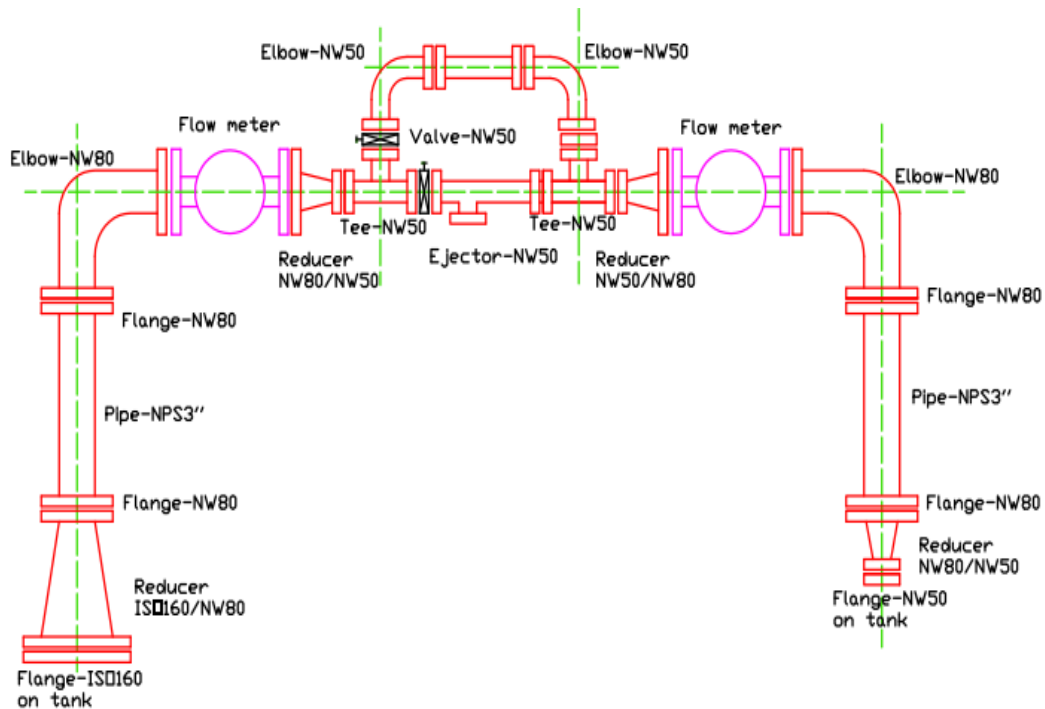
MED plant inter-stage connection vapor pipe line: instruments arrangement
